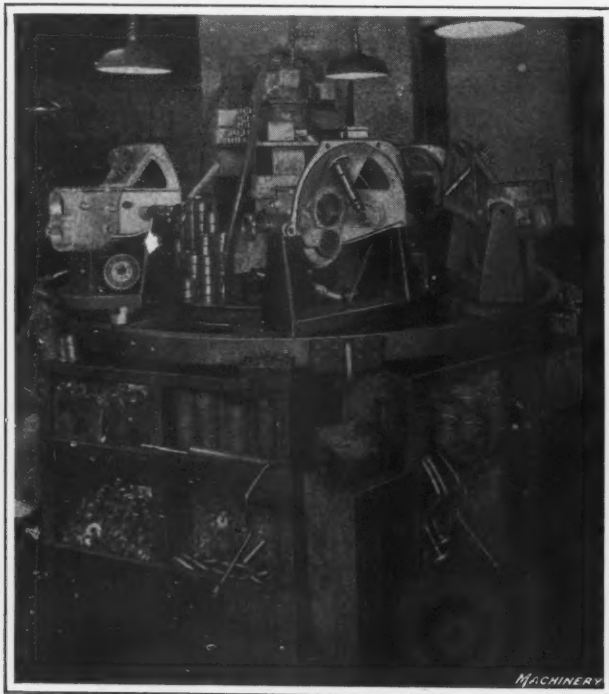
Progressive Assembling Bench that carries Fixtures around a Circular Path where Parts to be assembled are distributed
